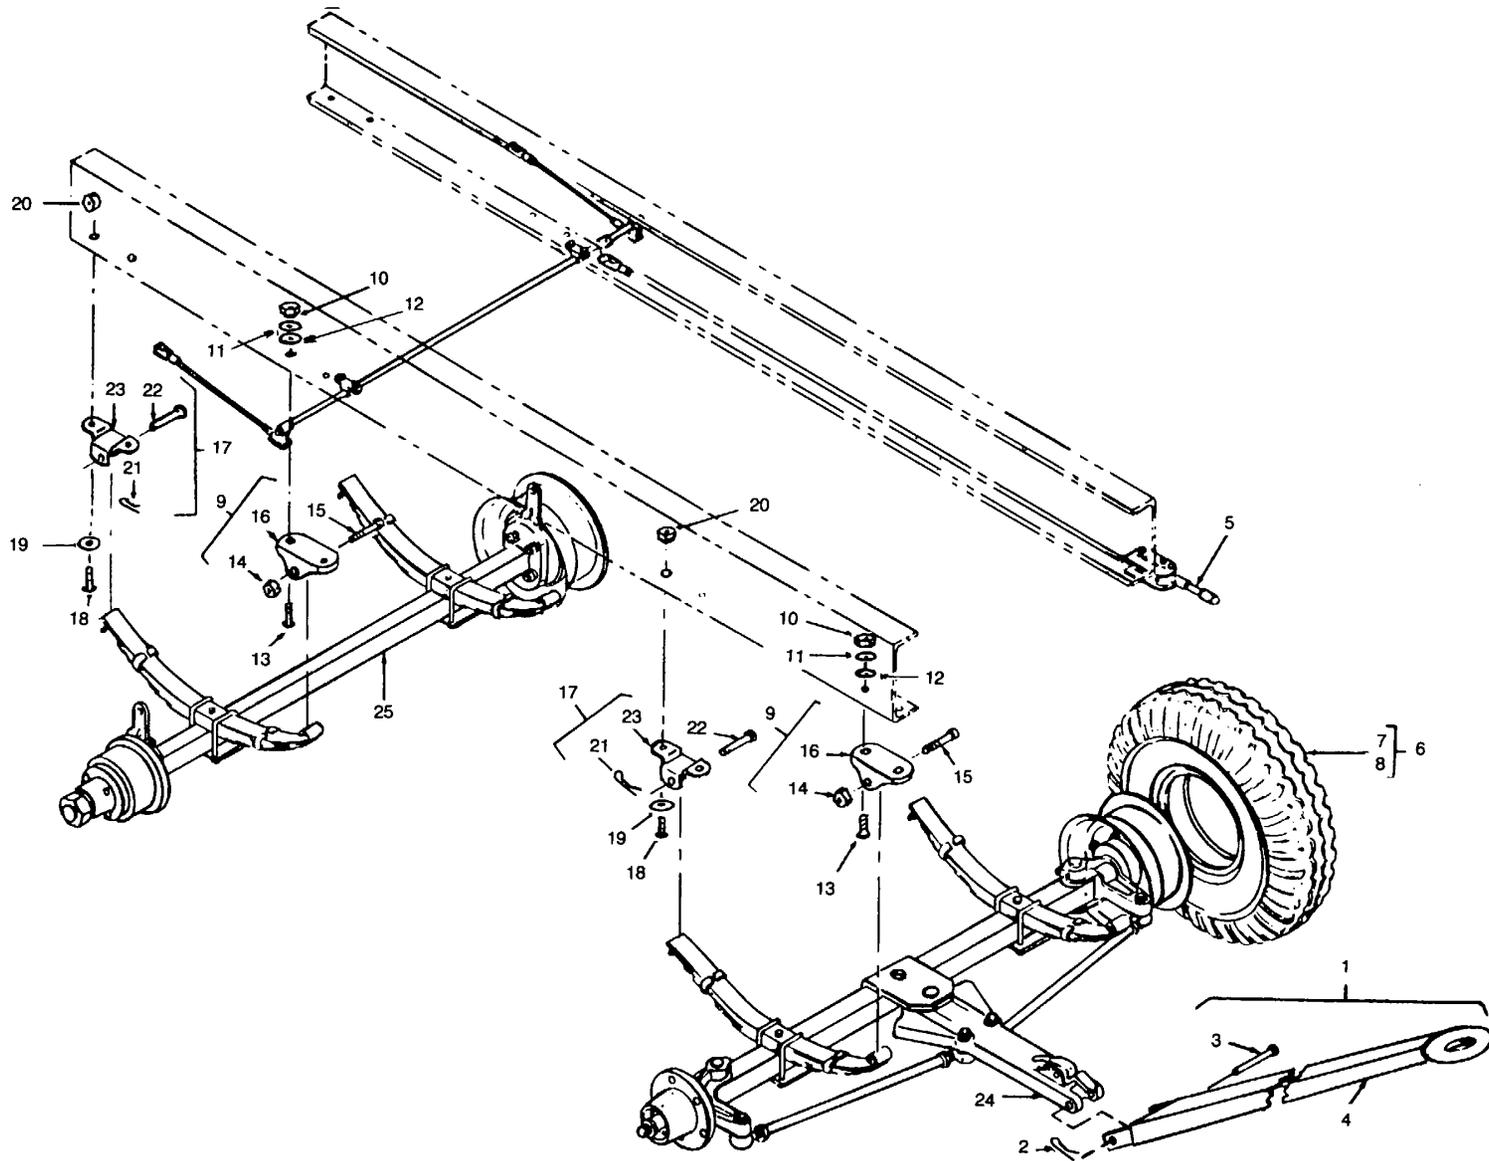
FOUR WHEEL RUNNING GEAR ASSEMBLY
